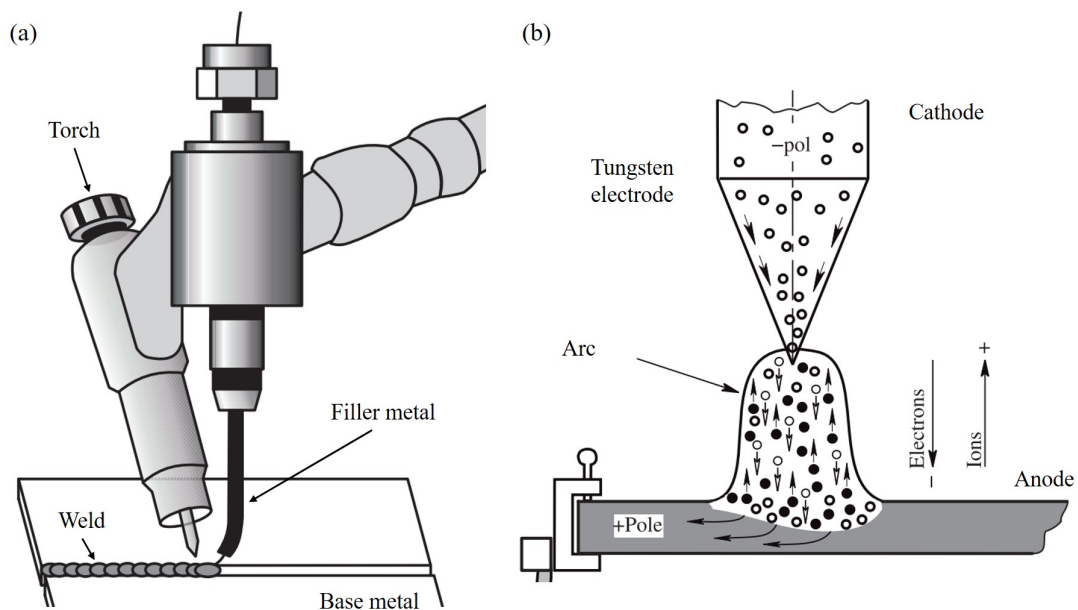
GTAW process showing (a) the displacement of the welding torch and filler metal over the base metal plate and (b) a close-up of region near the electrode tip showing the migration of electrons and ions [82].
